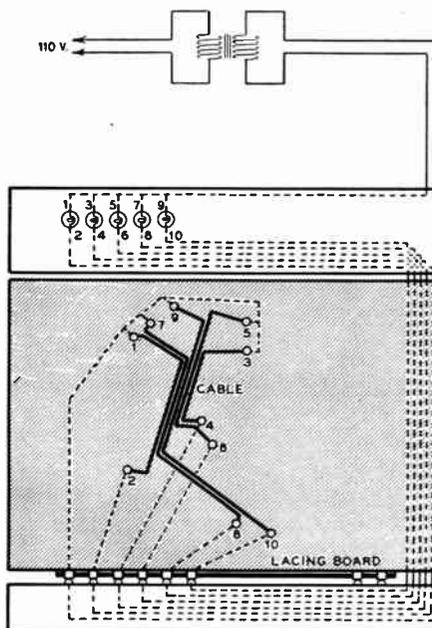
CONNECTIONS OF THE TEST FIXTURE
